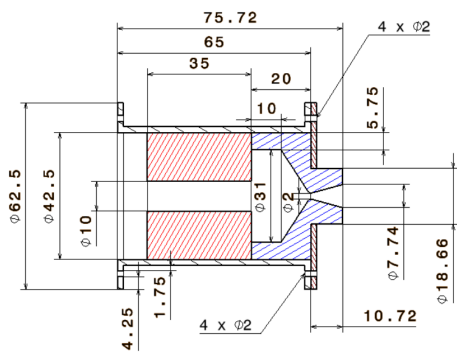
CAD model section of thrust chamber (dimensions in mm). In blue the conical nozzle, in red the fuel grain, in black the external case, in brown a closing flange (wall thickness flange and case: 2 mm).
